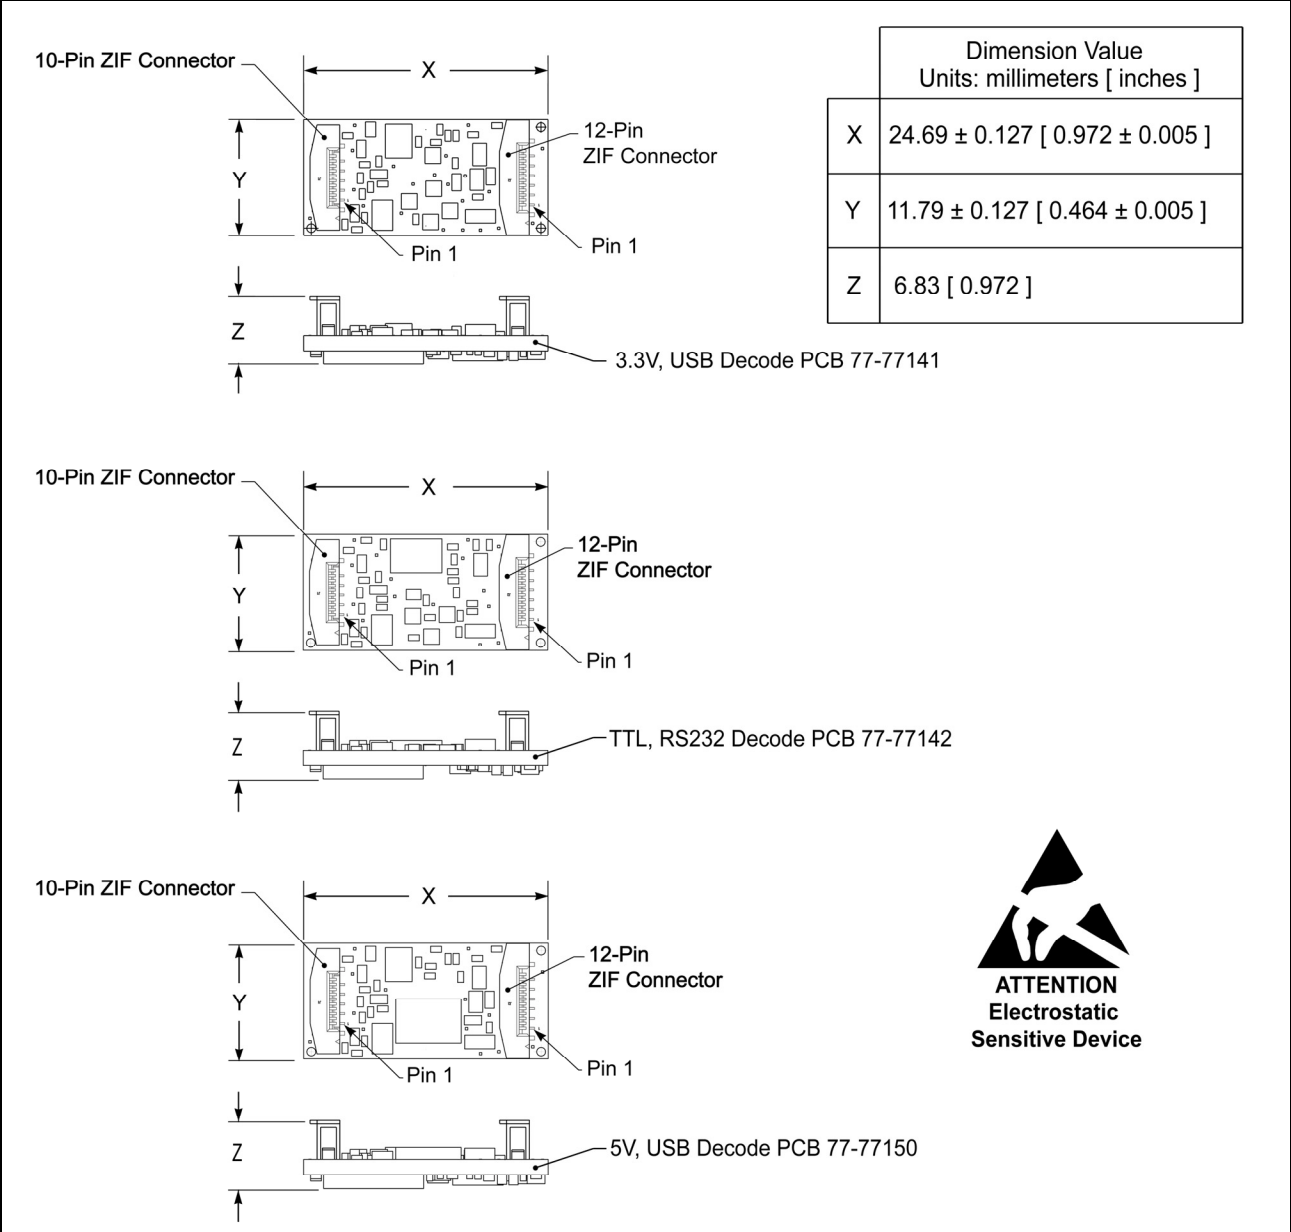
IS4823/IS4825 Decode PCB Dimensions
